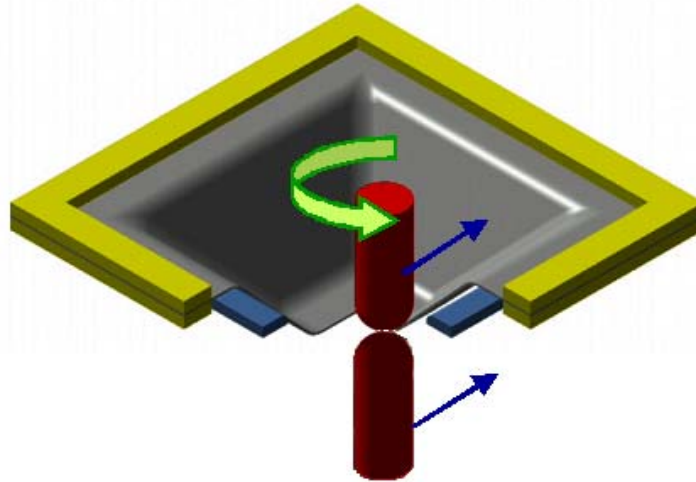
Kinematic incremental sheet forming using two forming tools—KISF.
